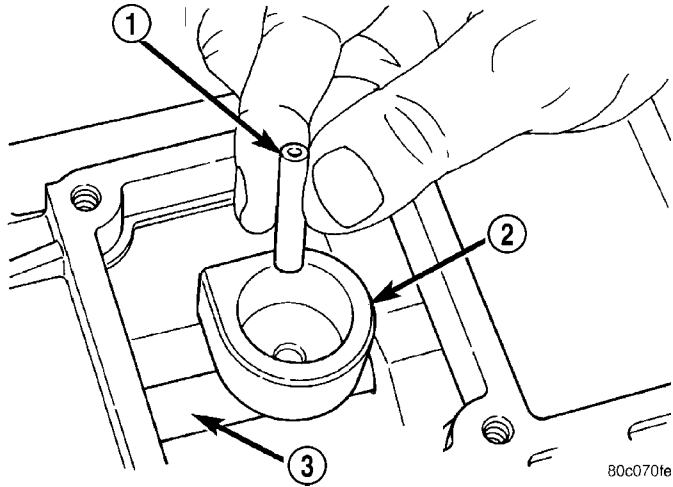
STARTING ROLL PIN IN SHIFT SOCKET
